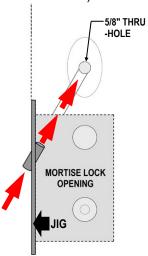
SIDE VIEW: DRILL JIG (N9511DJ) DRILL HOLE INSIDE DOOR
